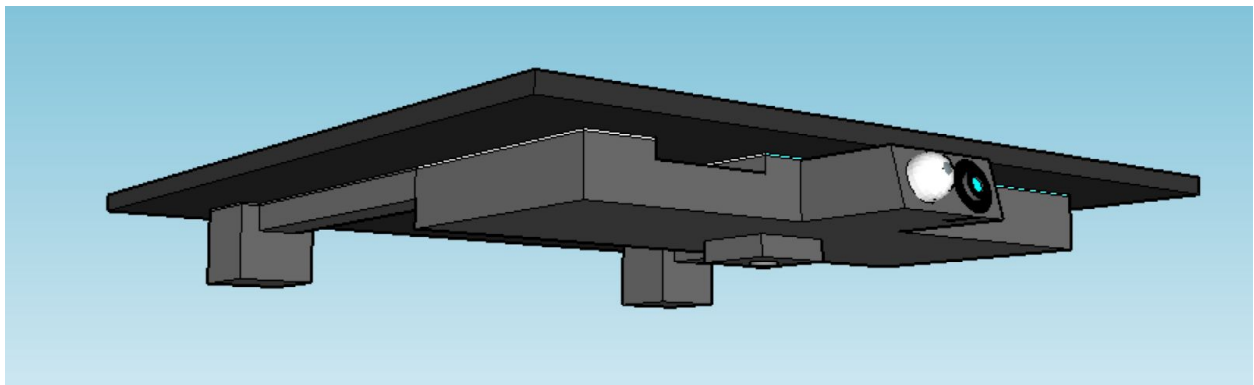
Side View, showing bottom 3D-Printed chassis, lift sensors
